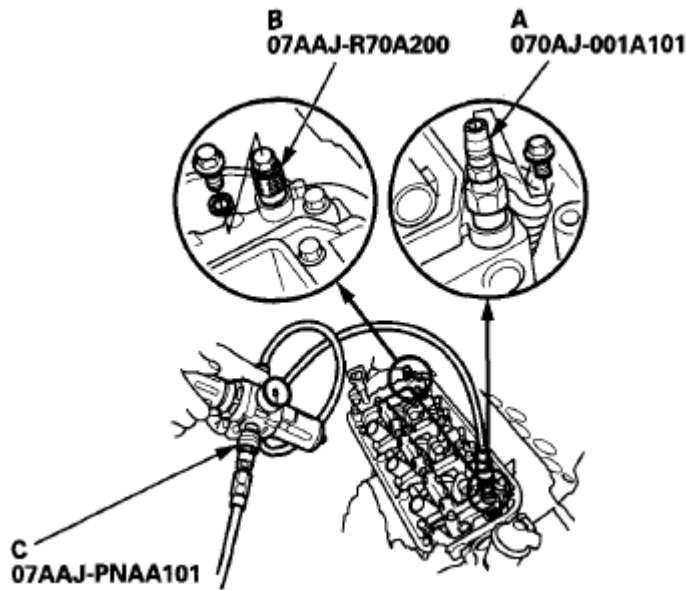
Identifying VCM Air Adapter And Air Pressure Adapter - Front
